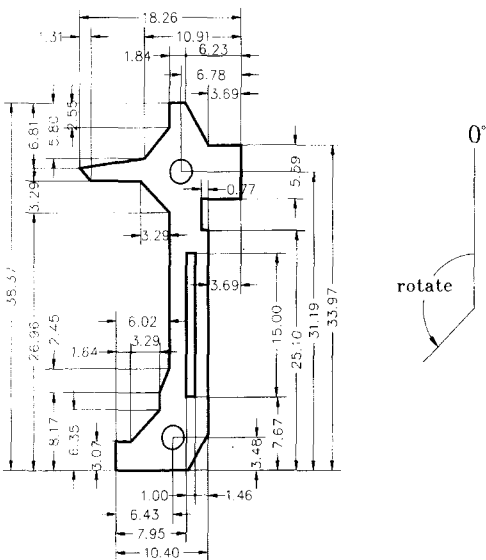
Drawing of a sample blank(1) with blanking and piercing processes
